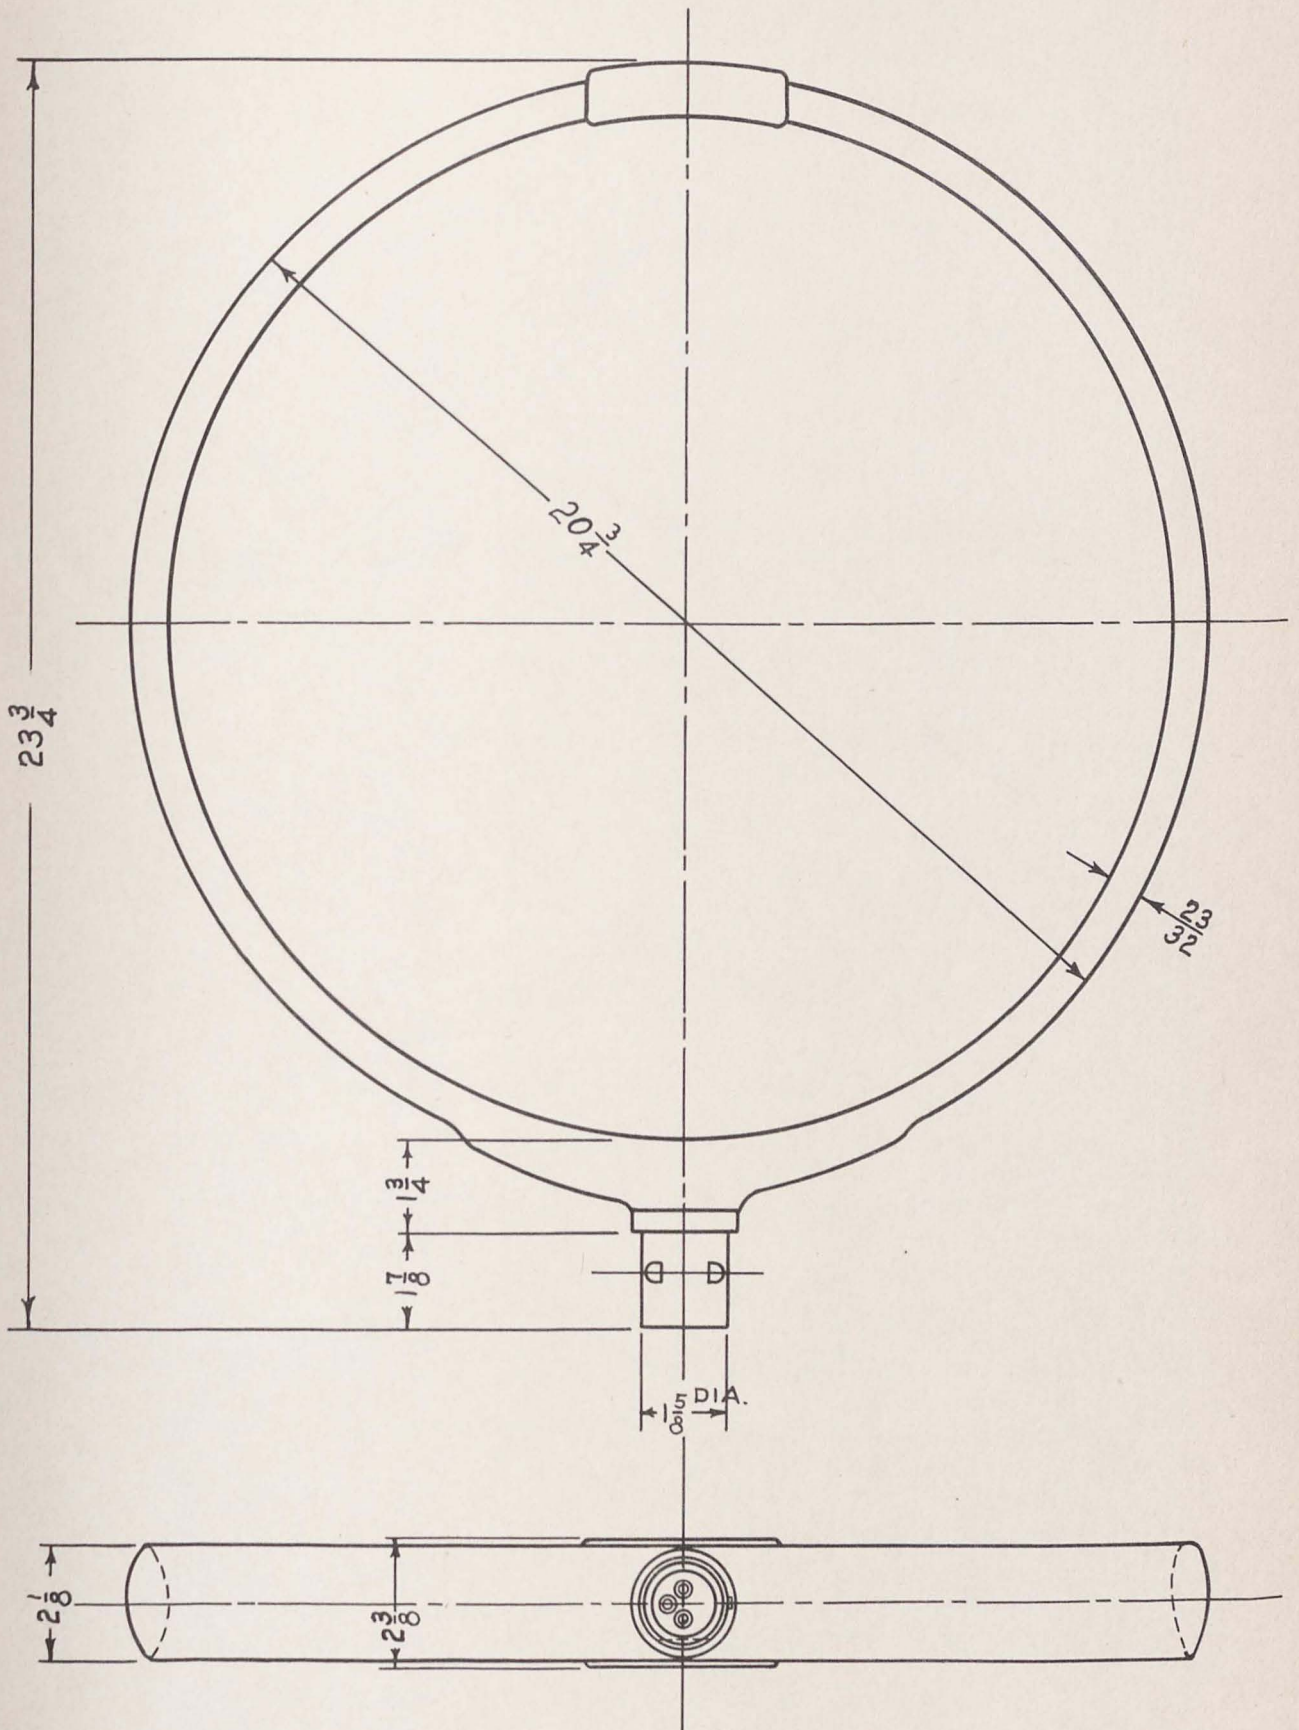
Loop LP-13-A, Outline Dimensional Drawing
